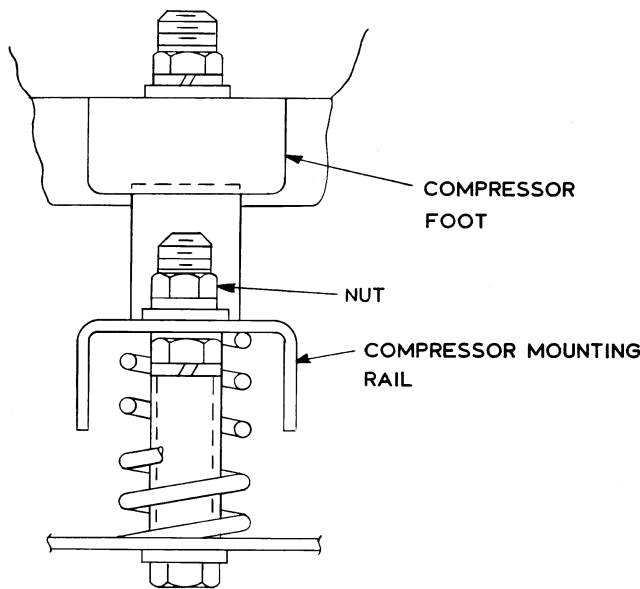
Front View of Compressor Mounting Rail Assembly — Size 105 Units
